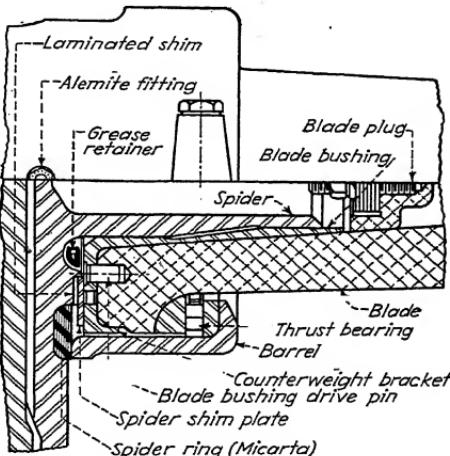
Assembly of bushing on shank of blade and in barrel.
